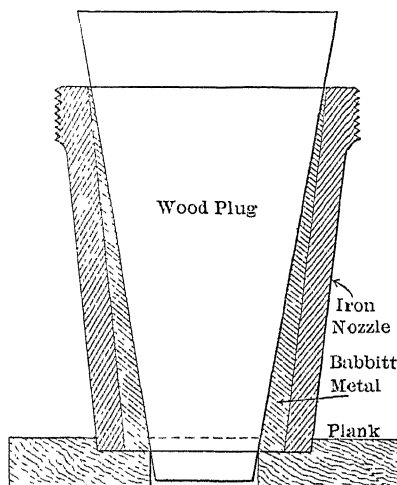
METHOD OF REDUCING THE SIZE OF A NOZZLE FOR A PIPE-LINE.
